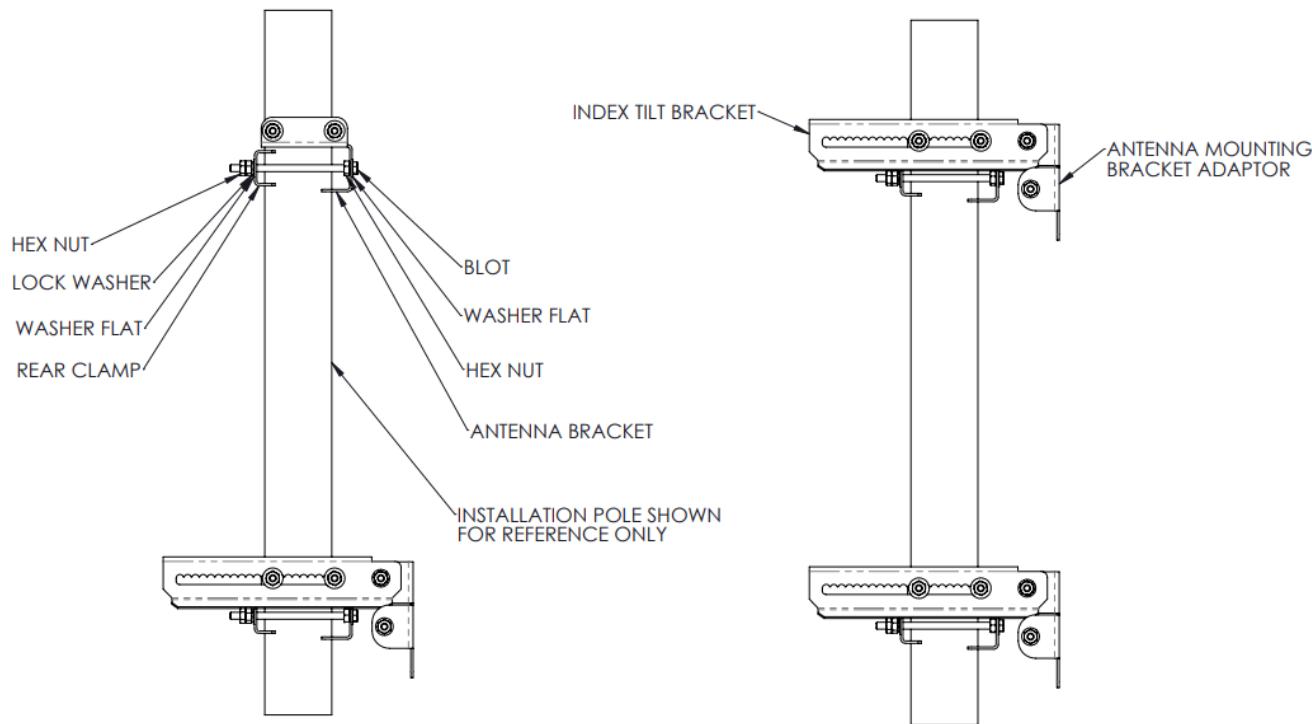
Mounting bracket to pole installation - SIDE VIEW
